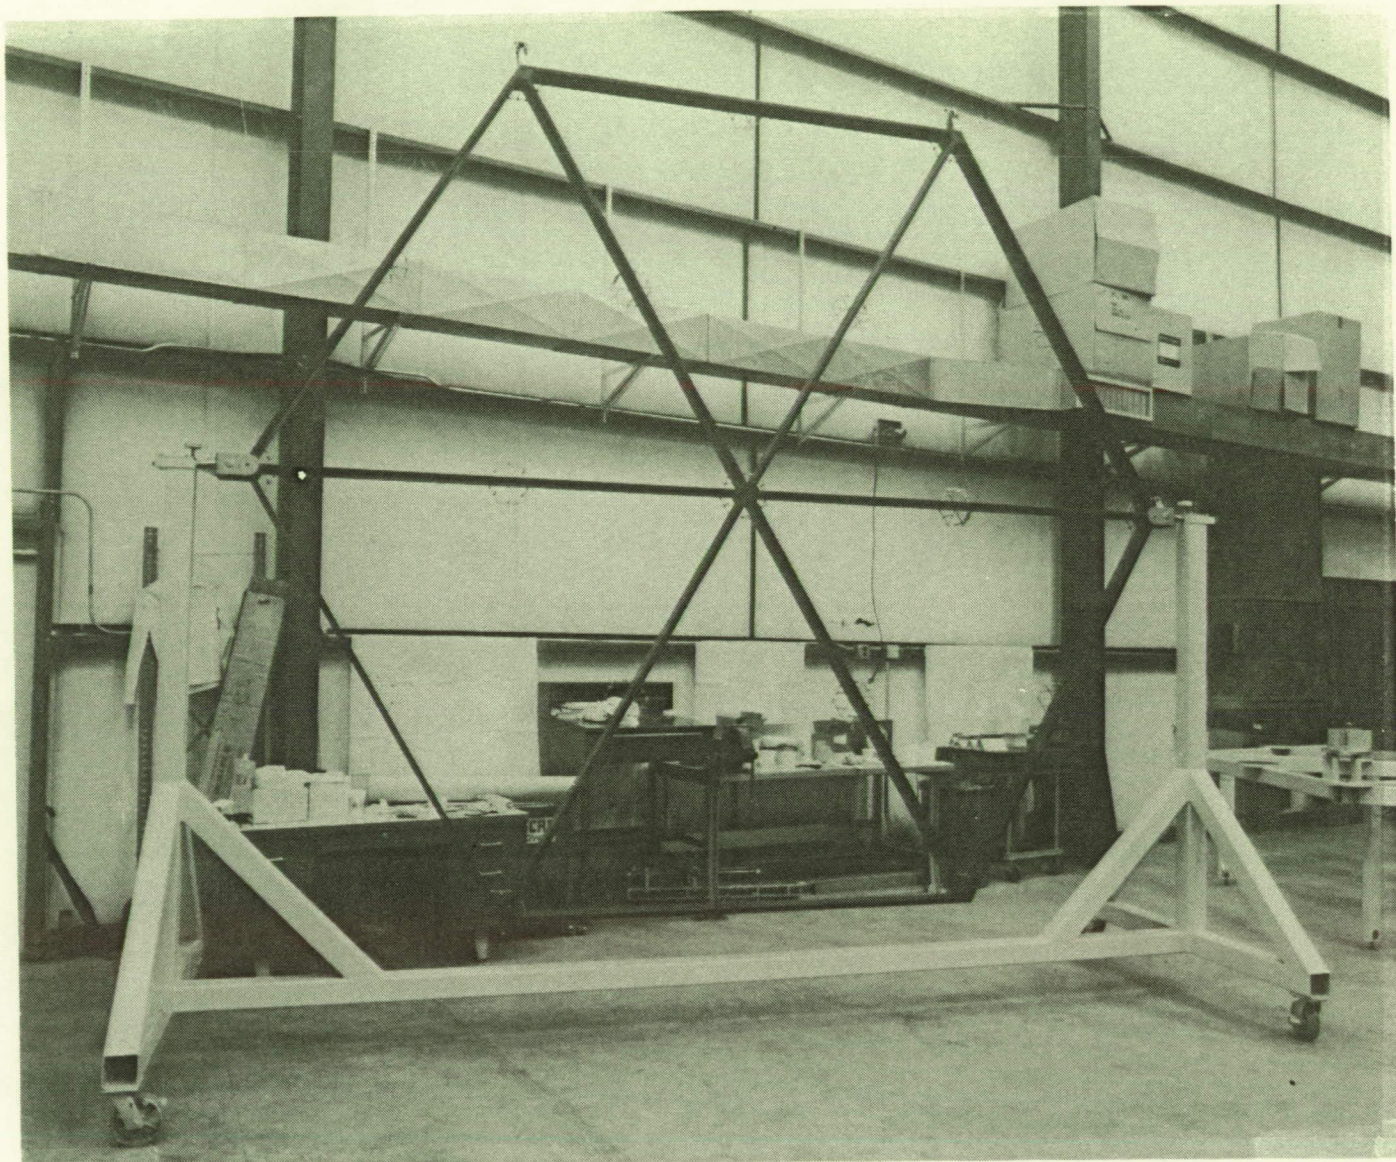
The Flexures and Standoffs Are Installed Using The Hex Panel Assembly Fixture To Hold The Panel Vertical
